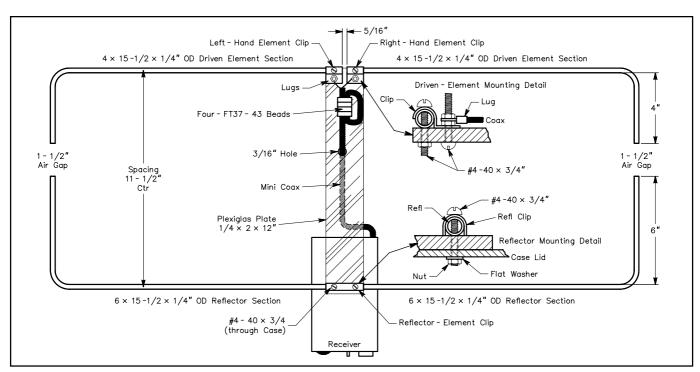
Antenna assembly details. See Table 1 for a list of parts needed. The driven- and reflector-element clamps are made of 0.032-inch hobby aluminum stock.
